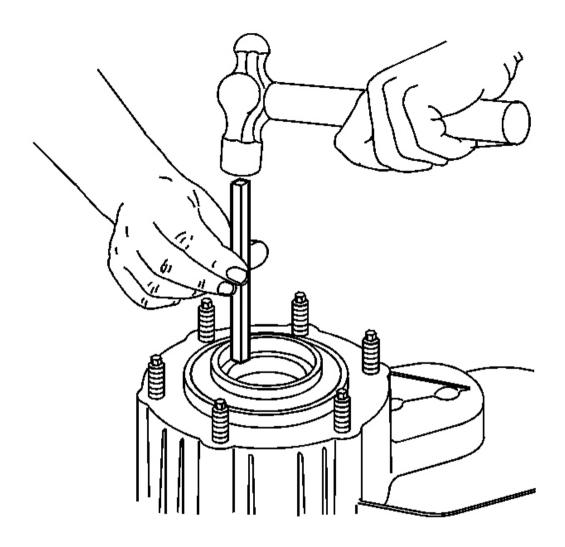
Removing Input Shaft Bearing From Front Case Half Using Hammer & Brass Drift Courtesy of GENERAL MOTORS CORP.
